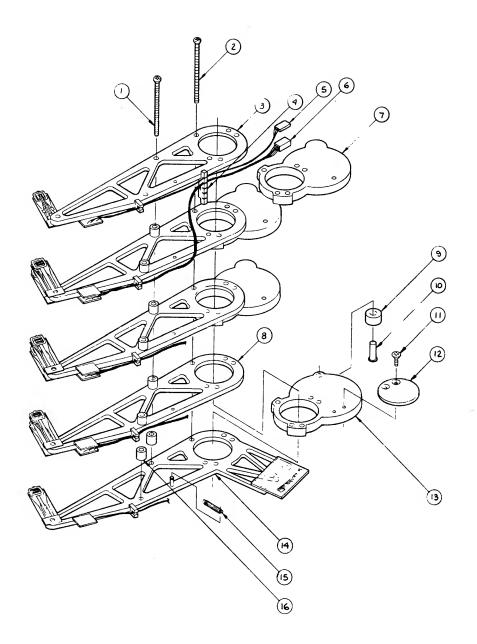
HEAD ARM SUB-ASSEMBLY
